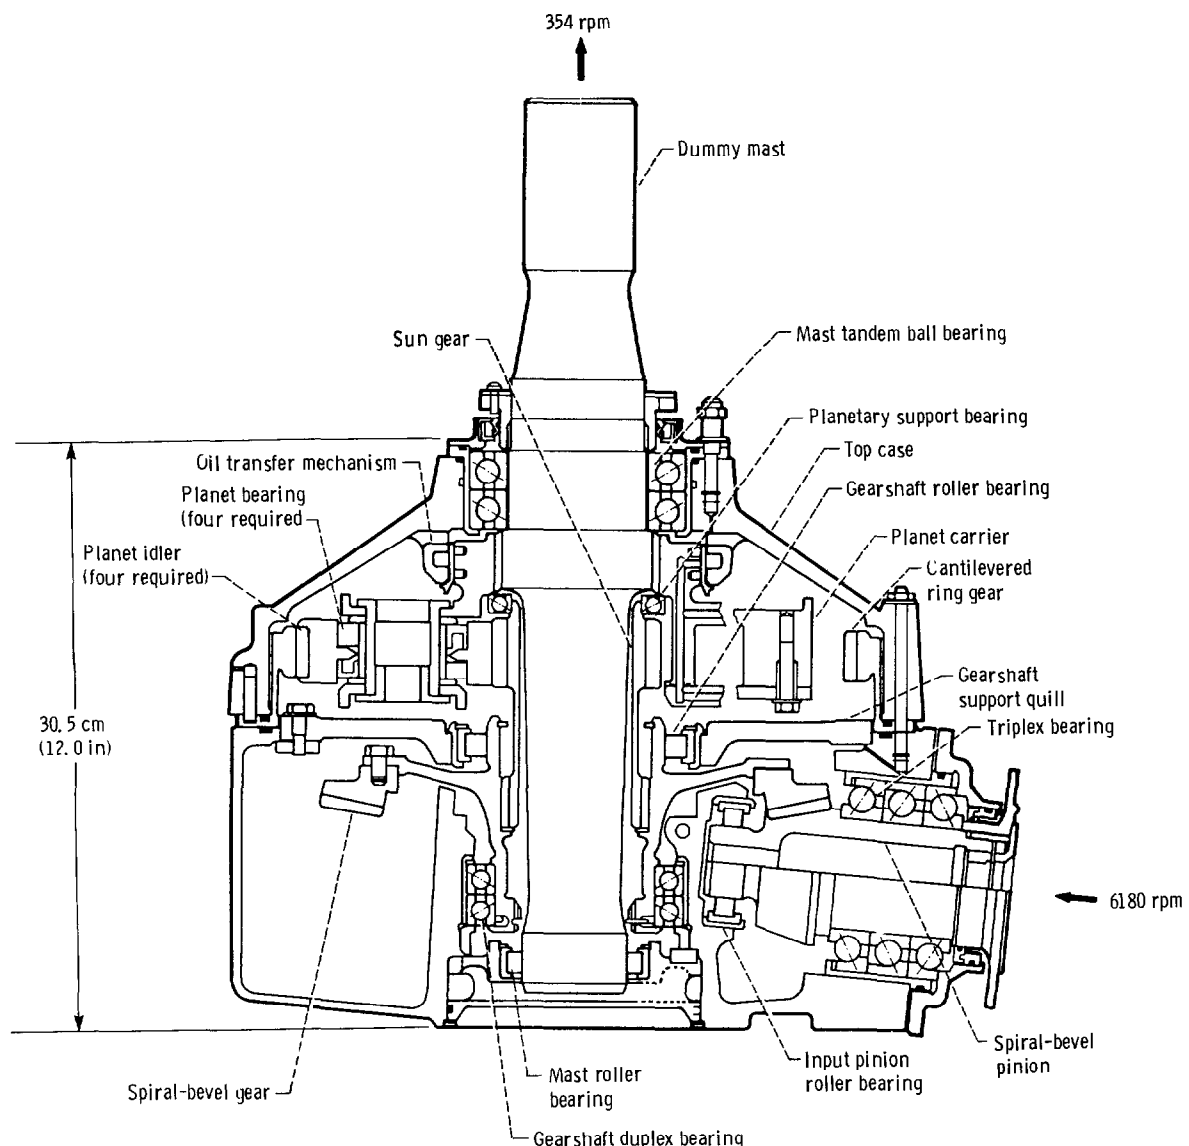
373-kW (500-hp) helicopter transmission comprising a spiral-bevel gearset and four planet systems.
